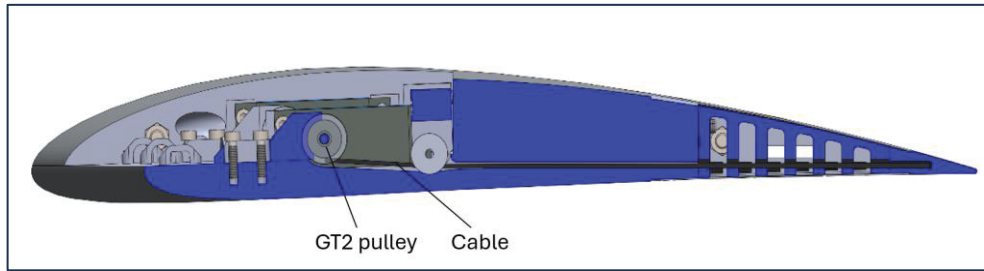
Cross-section view of the control system in the wing box with GT2 pulley
